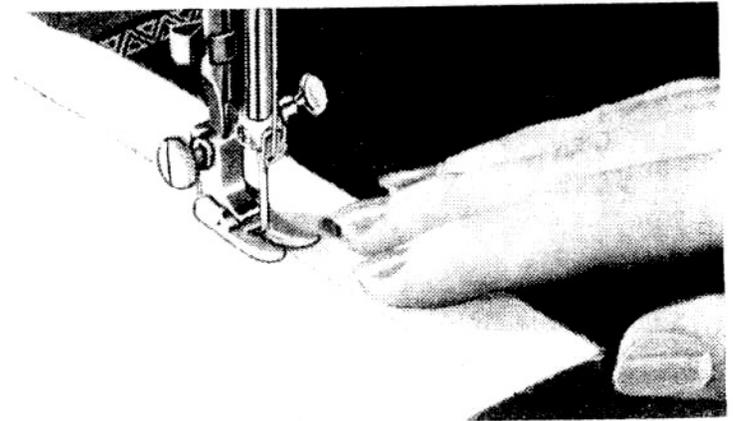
Following Drawn Thread with All-purpose Presser Foot
